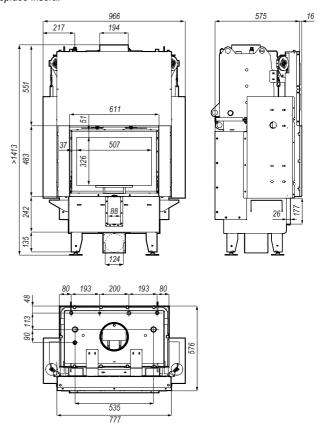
Projections with dimensions of DEFRO HOME RIVA ME fire-place insert.
